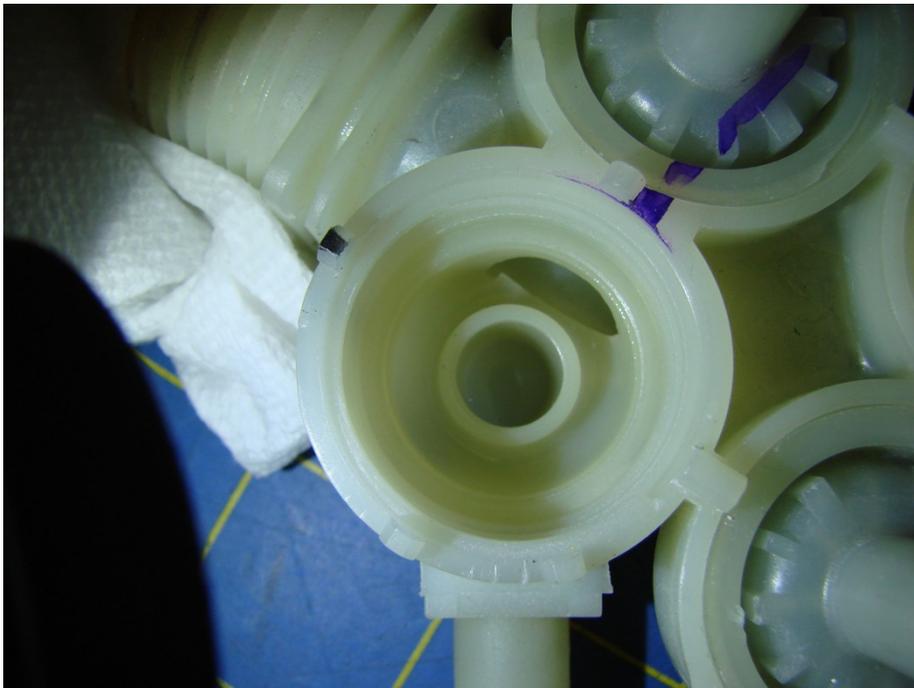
The upper body, including the plunger, spring and diaphragm assembly has been removed, showing the lower pressure retaining body and seat of the valve.
